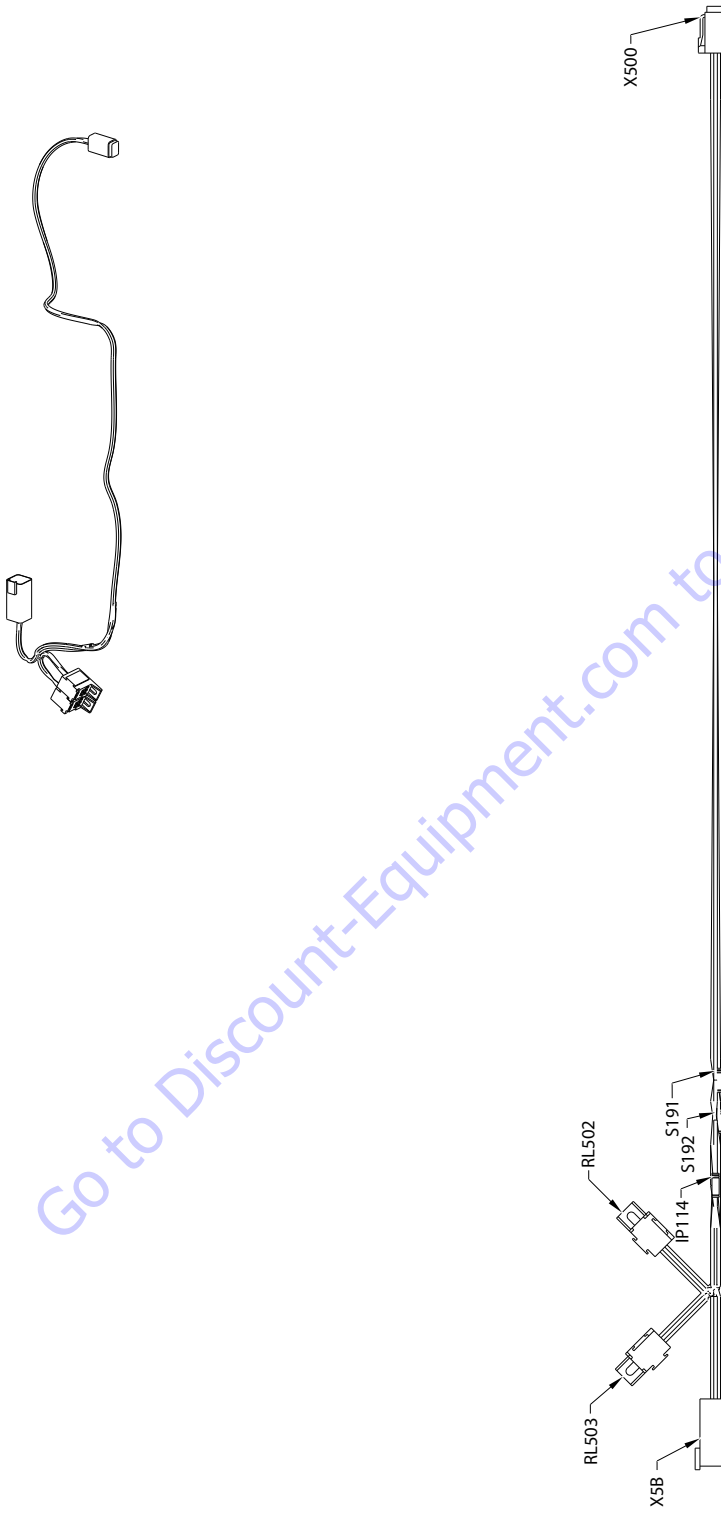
Platform Valve w/Jib Harness - Sheet 3 of 3
